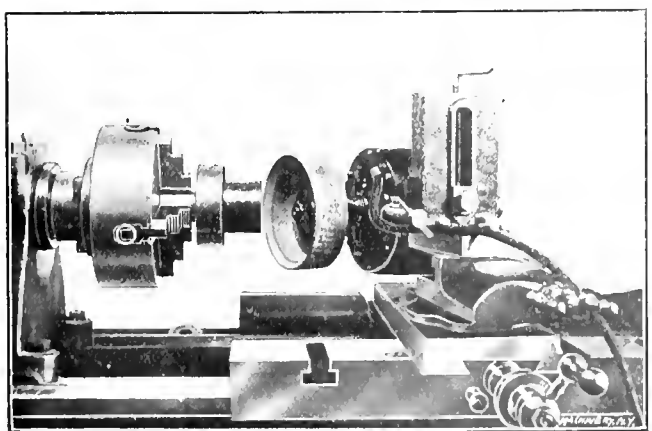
Grinding a Punch with a Cup Wheel to give Shear.
